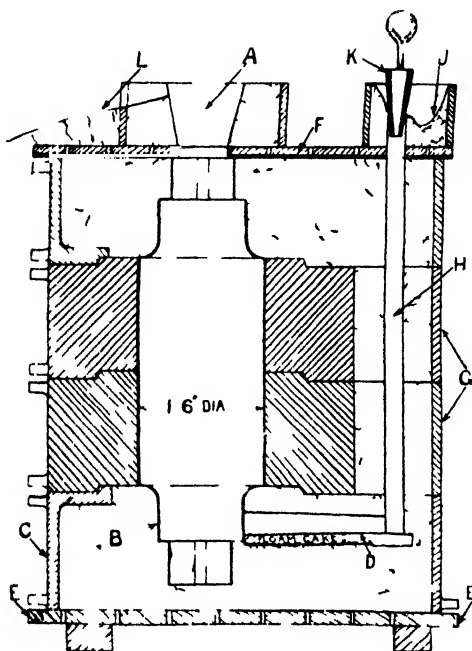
MACHINE FOR CASTING A CHILLED ROLL IN IRON
